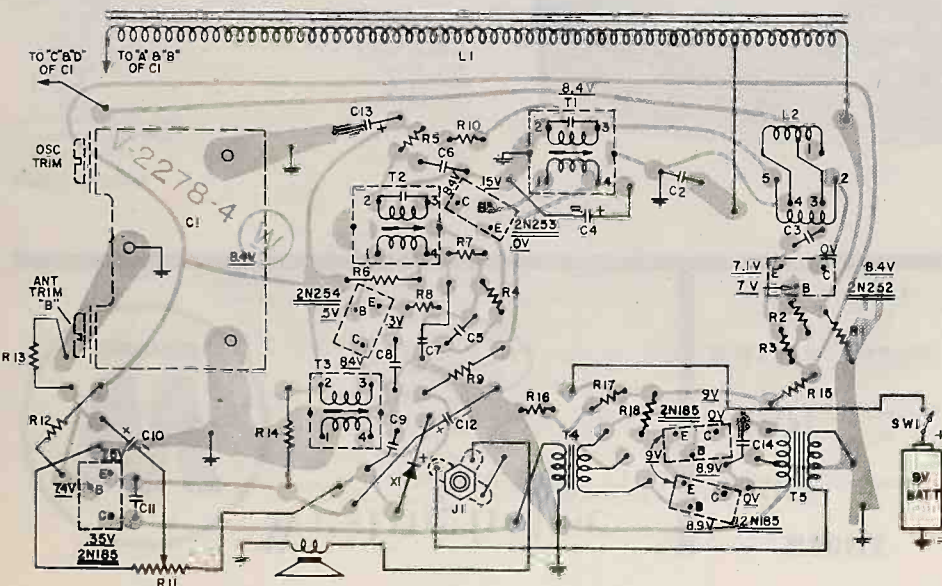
BOTTOM VIEW OF PRINTED CIRCUIT BOARD SHOWING COMPONENTS SYMBOLICALLY
